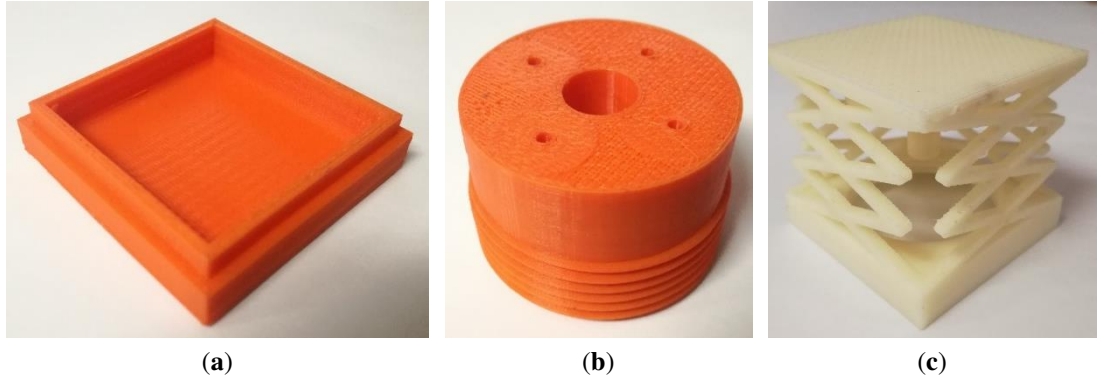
3D Printed sensor parts: (a) Bottom pad; (b) Inner support; (c) Square type spring structure.
